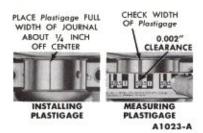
Installing and Measuring Plastigage—Engine on Work Stand
